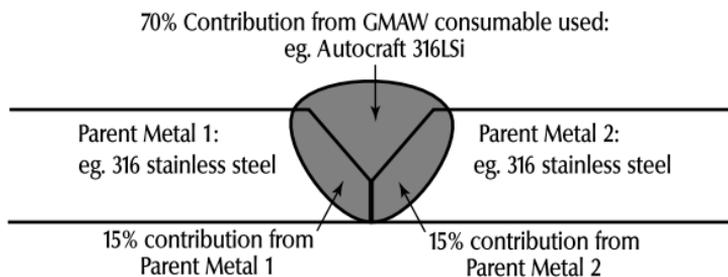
Example of 30% dilution in a stainless steel butt weld using the GMAW process with Autocraft 316LSi welding wire.
